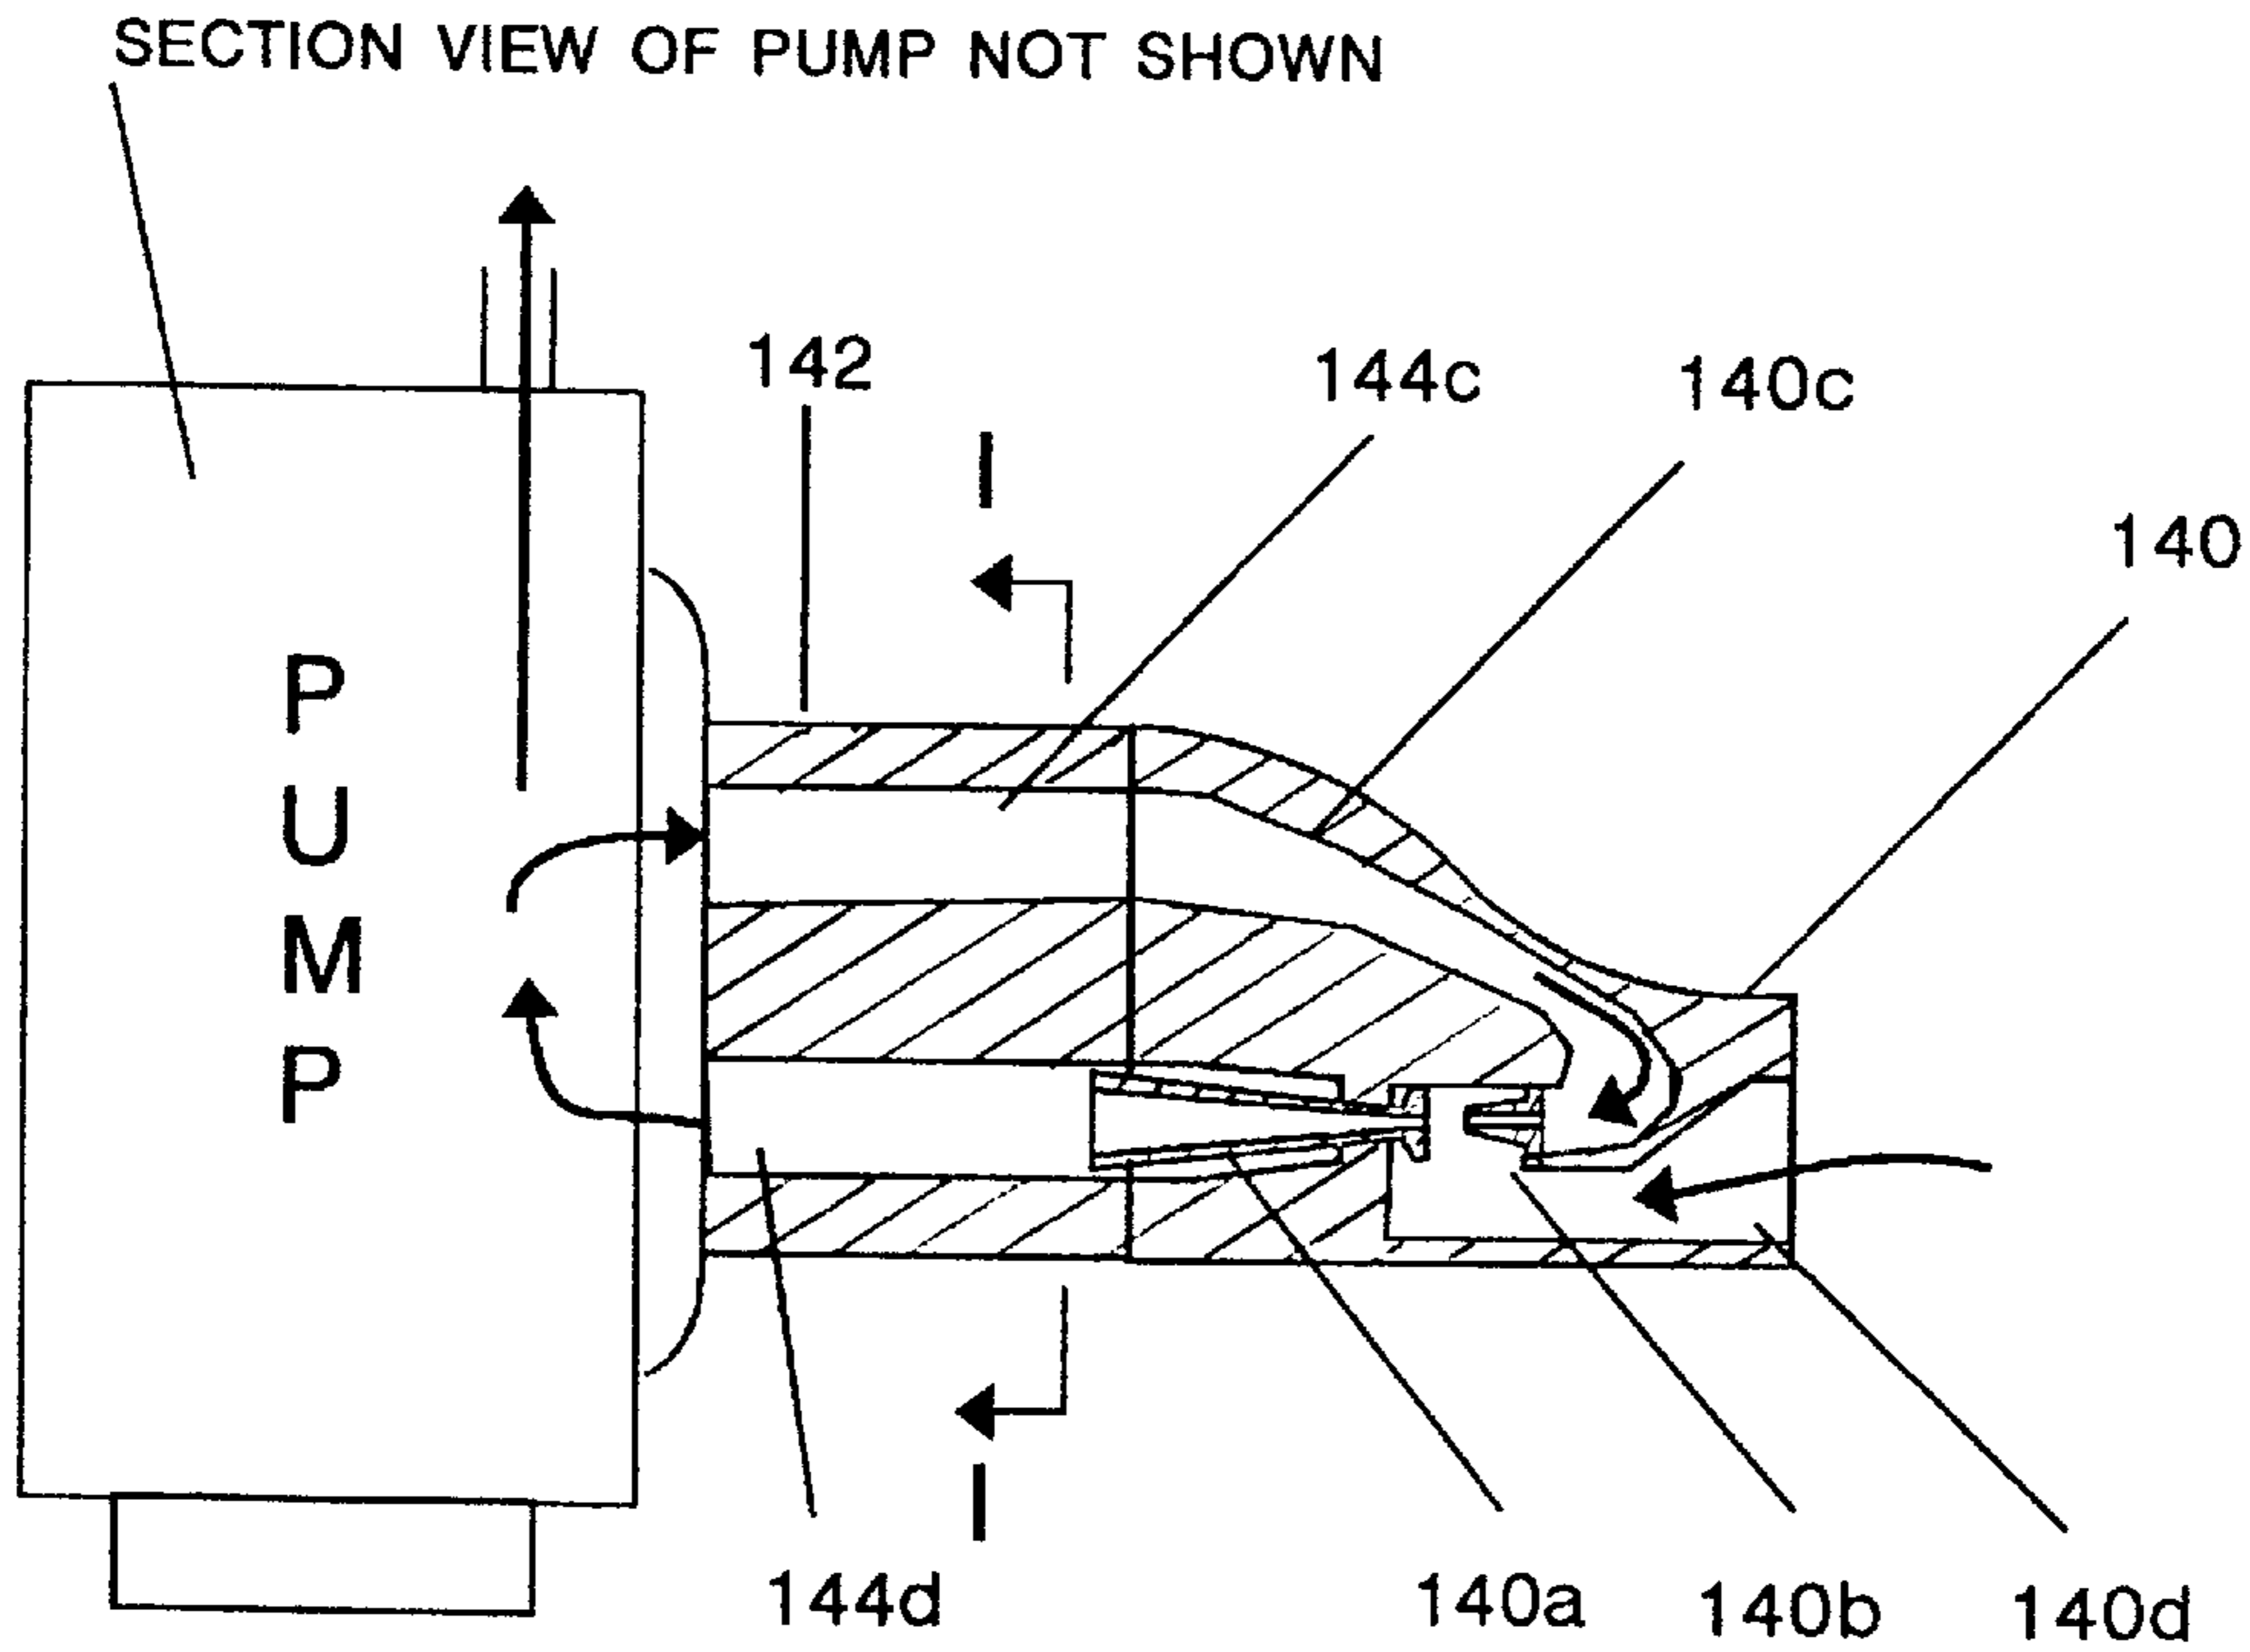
SECTION THROUGH EJECTOR PUMP 140
